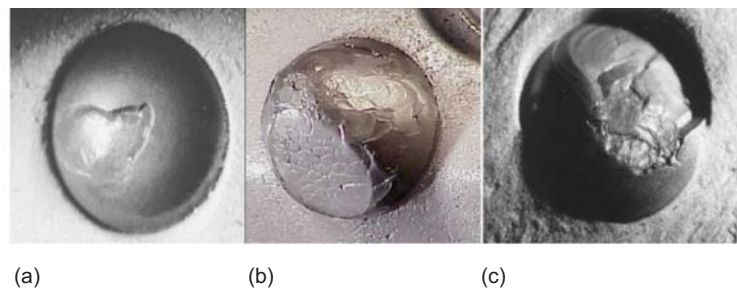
Typical failure modes of PDC inserts: (a) spalling; (b) chipping and heat checking; (c) breakage (Fang et al. 2001).
